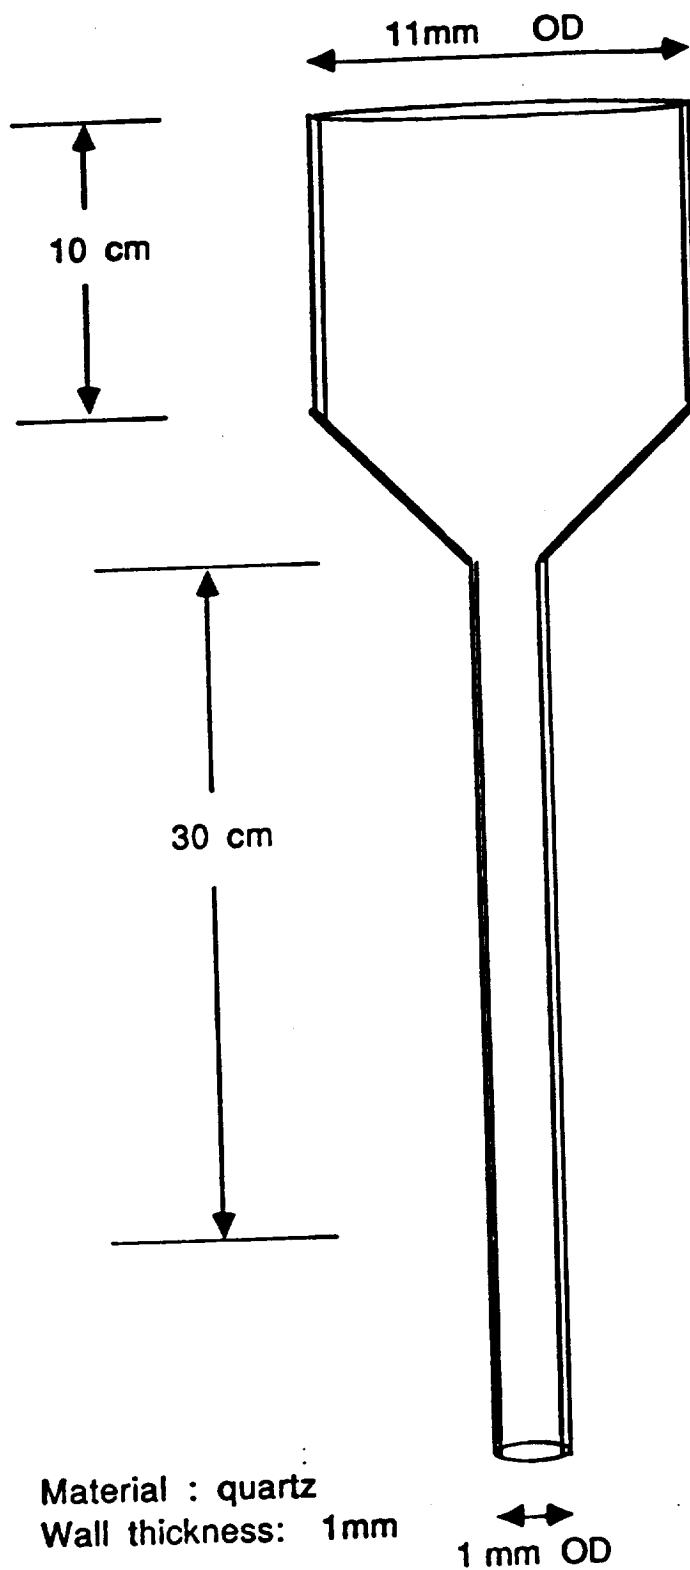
Design of the ampoule used to load the material in the furnace. The broad part of the ampoule is cut off after sealing the ampoule.
